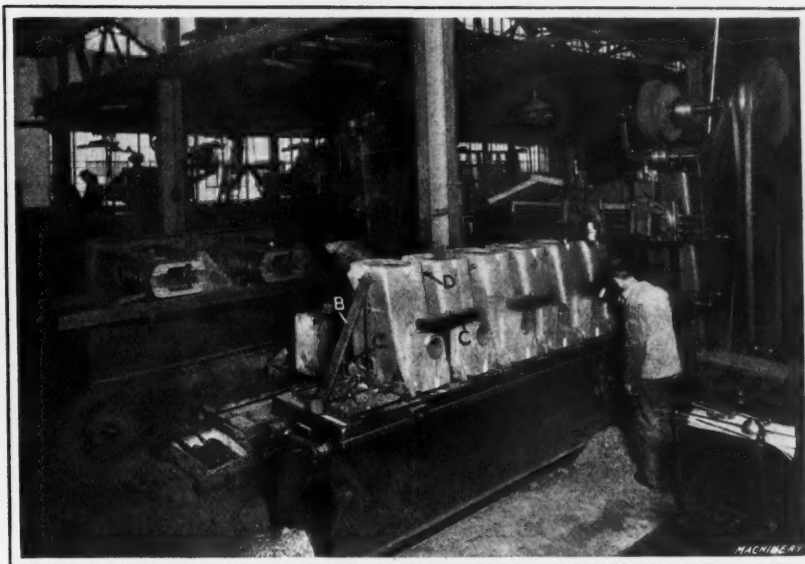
Open-side Planer using One Rail-head and One Side-head simultaneously for planing Milling Machine Knees
